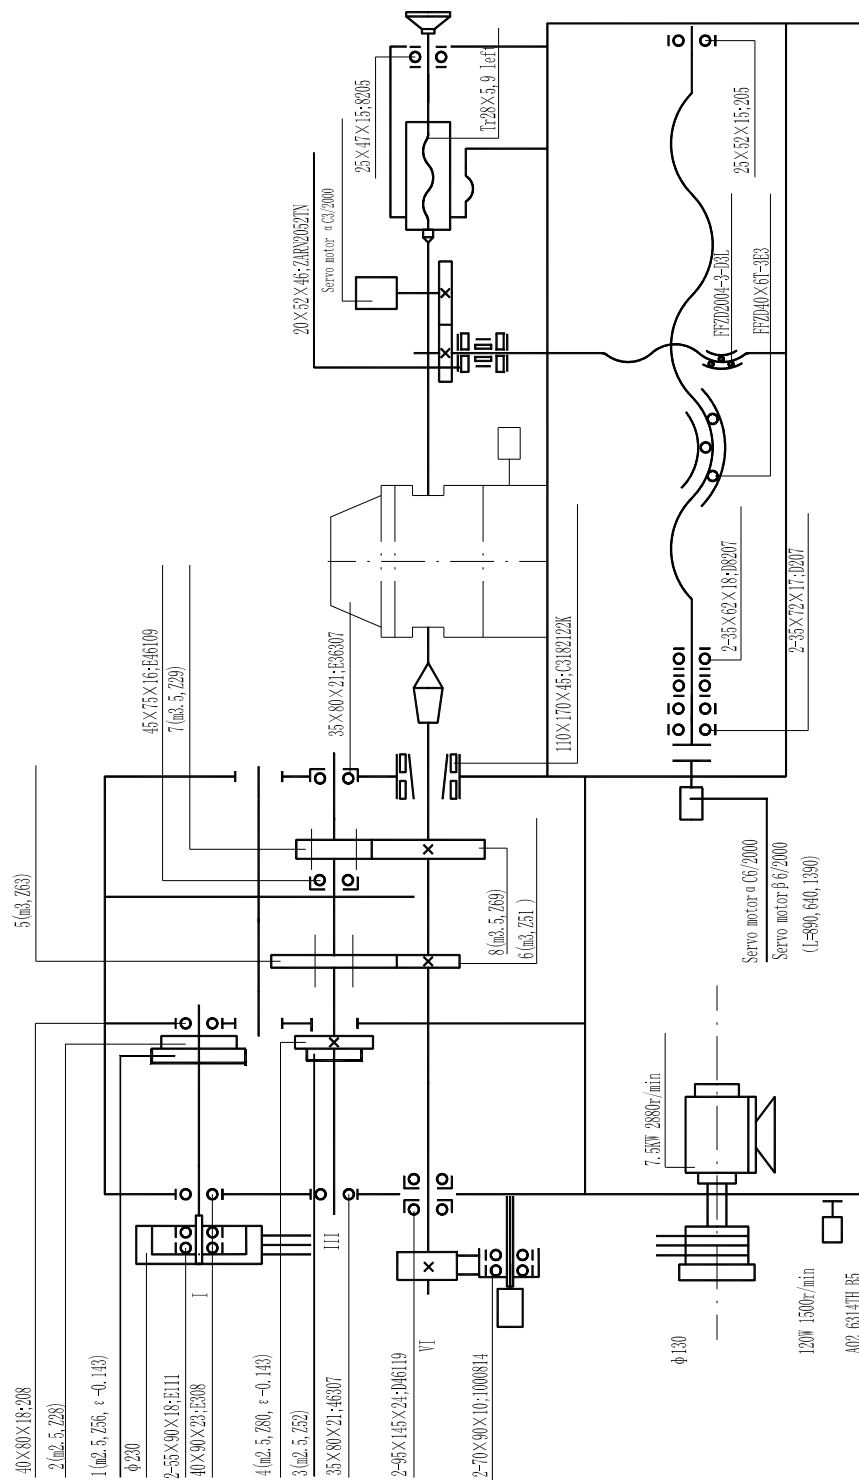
Drawing of main transmission (hydraulic changing step)
